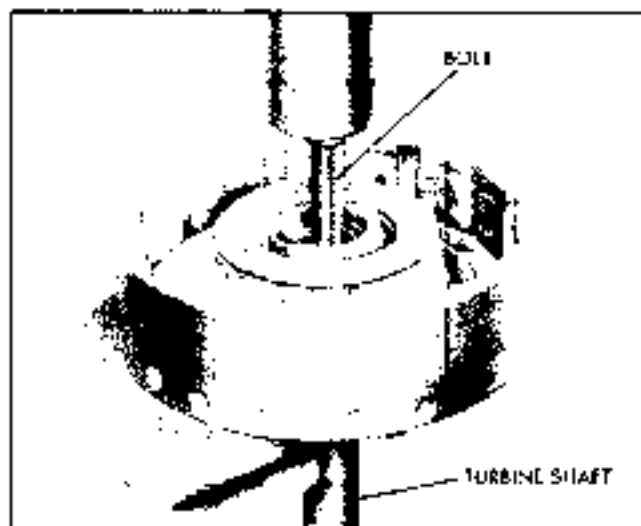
E-80 Removing Turbine Shaft from Forward Clutch Housing
